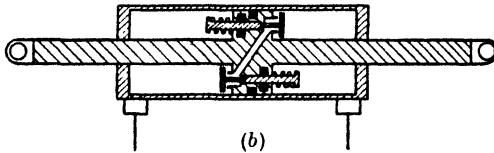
(b). METHOD OF MOUNTING SYNCHRONIZING VALVES IN THE JACK PISTON
